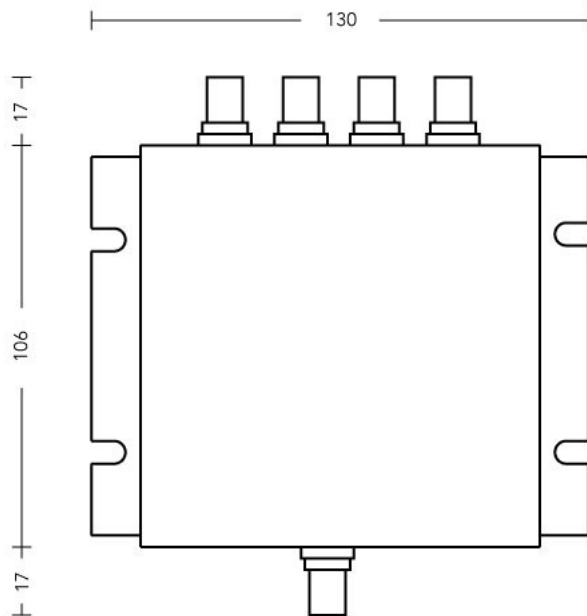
Drawing of hfMux-4 Multiplexer, other models accordingly (all dimensions in mm)
